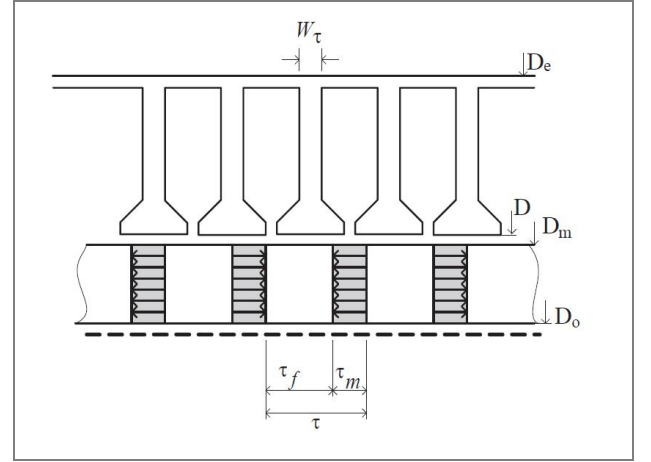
Dimensioned drawing of TL-IPM (adapted from [25]).
